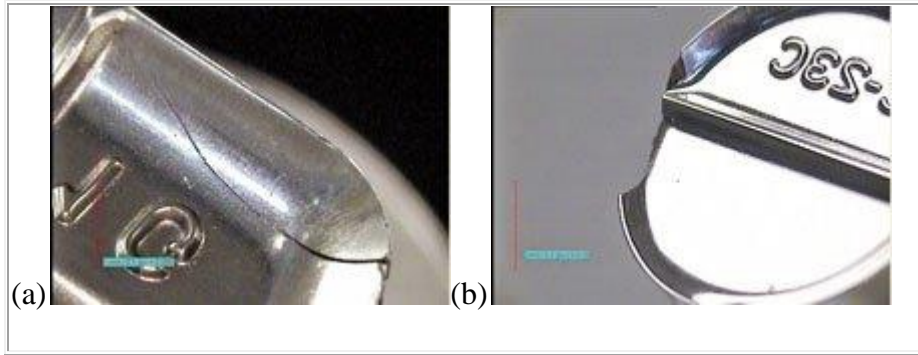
Punch-tip edges show (a) cracking and (b) piece of tip edge broken away.
